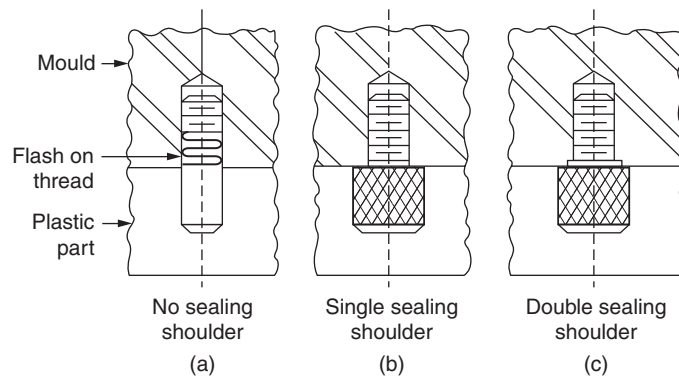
If the outside diameters of an insert are used to hold the insert in place during the moulding operation, tight tolerances are required.
